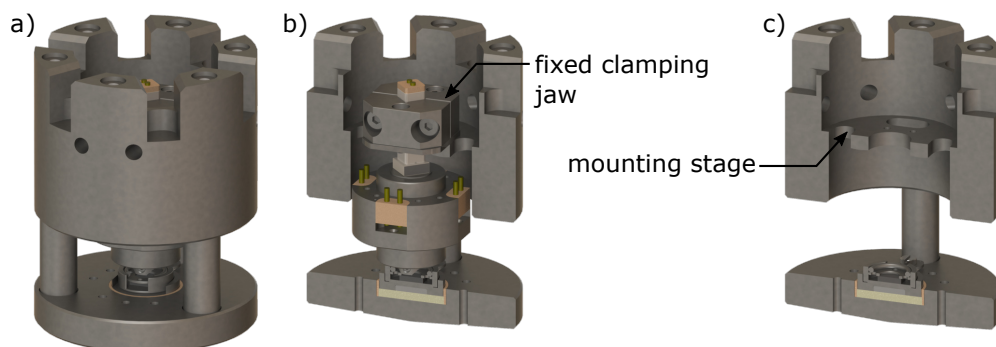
(a – b) complete assembly of the STM consisting of a version 3 inner- and version 2 outer STM with attached tip- and sample holders, (b) in sectional view. (c) Sectional view of the outer STM version 2 with attached sample holder.
